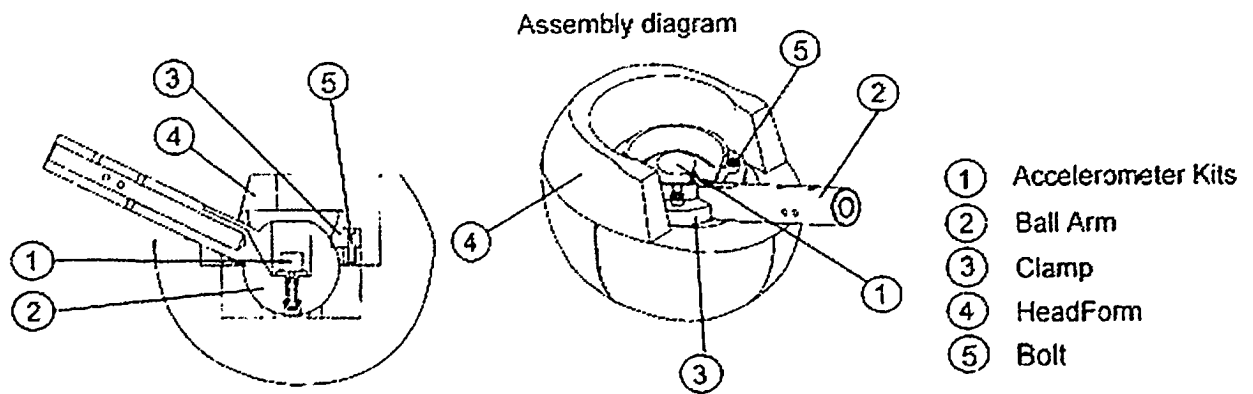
The Half Magnesium K1Aa showing the accelerometer location, ball arm, clamp, and attachment bolts (Cadex, 2006a).
